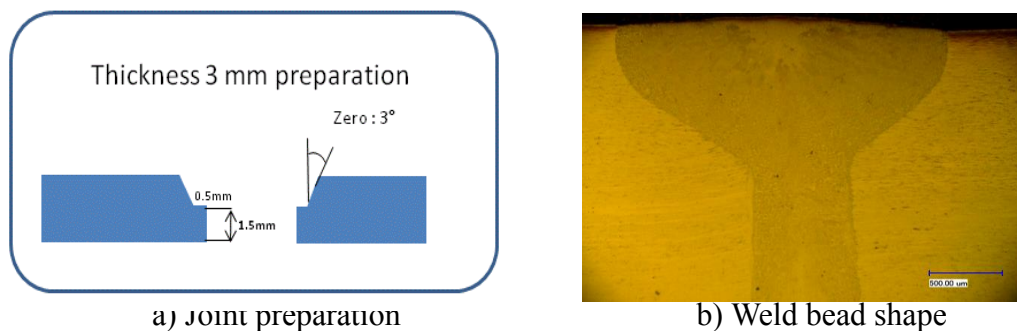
NGLW of 3 mm thick 316L stainless steel
